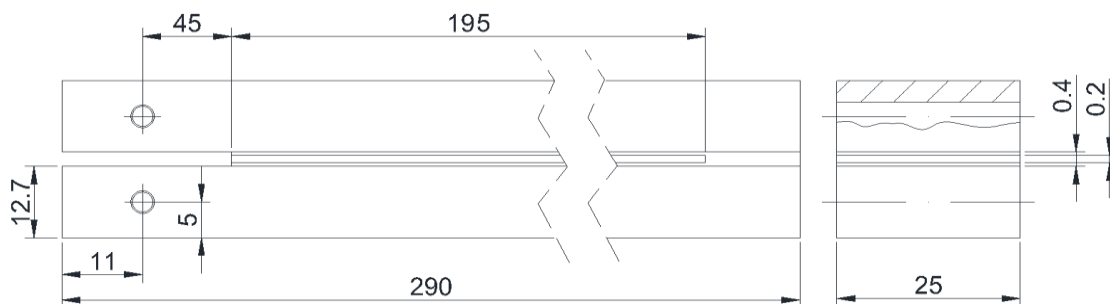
Definition draw of an ODCB specimen (dimensions in mm).
